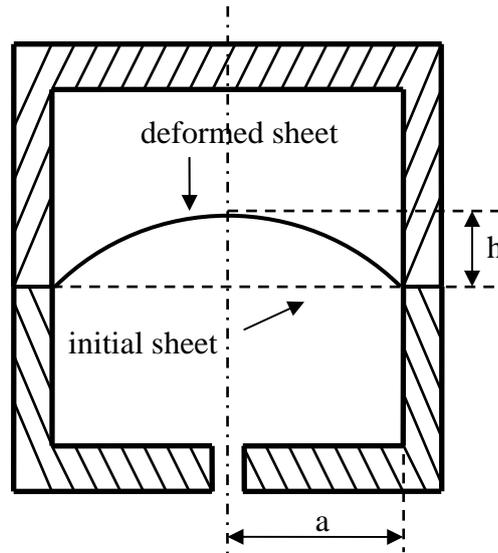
Example of free forming process: the draw shows the deformed metal sheet
